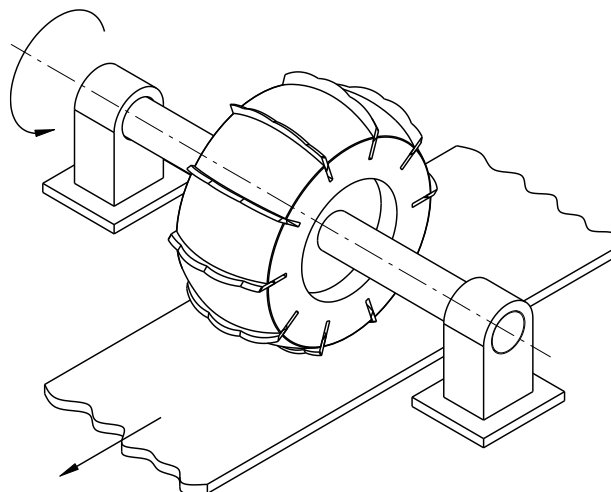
Scheme of a drum of a staking machine with alternating knives with offset protrusions and grooves
